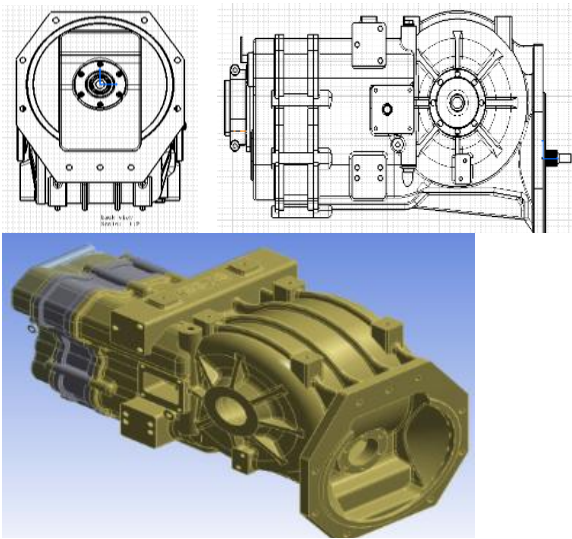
CAD model of heavy vehicle medium duty truck transmission gearbox housing
